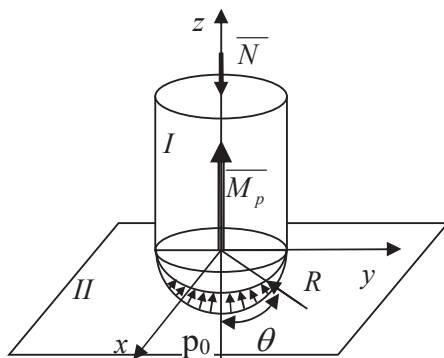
Pivoting friction of a shaft with hemispherical cap
